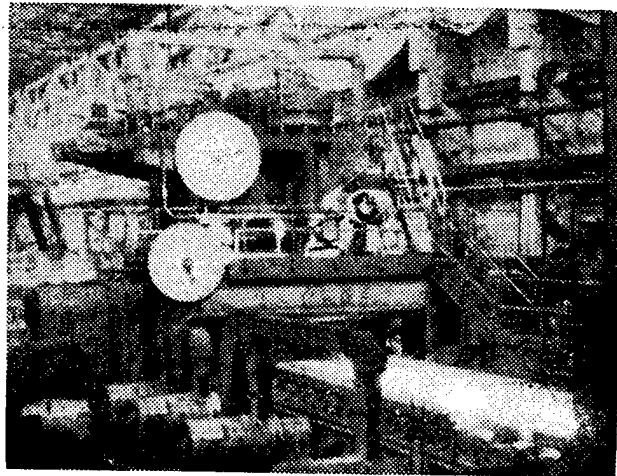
Photo of a rough rolling machine, part of a 1.7 meter rolling machine unit designed and built by Chinese engineers, now in operation at the Benxi Iron and Steel Company
